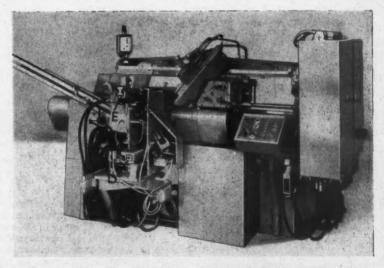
This +GF+ KDM-7/50 copying lathe is fitted with automatic work loading, indexing, and gauging equipment for handling cruciform components for universal joints
